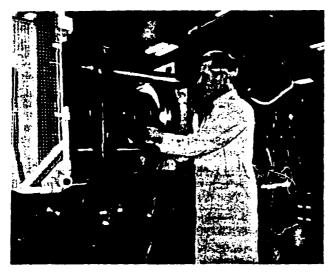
An operator removing a polypropylene bowl from an injection-moulding machine.
